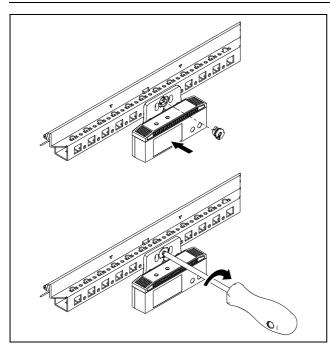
Mounting the sensor in the enclosure or IT enclosure
